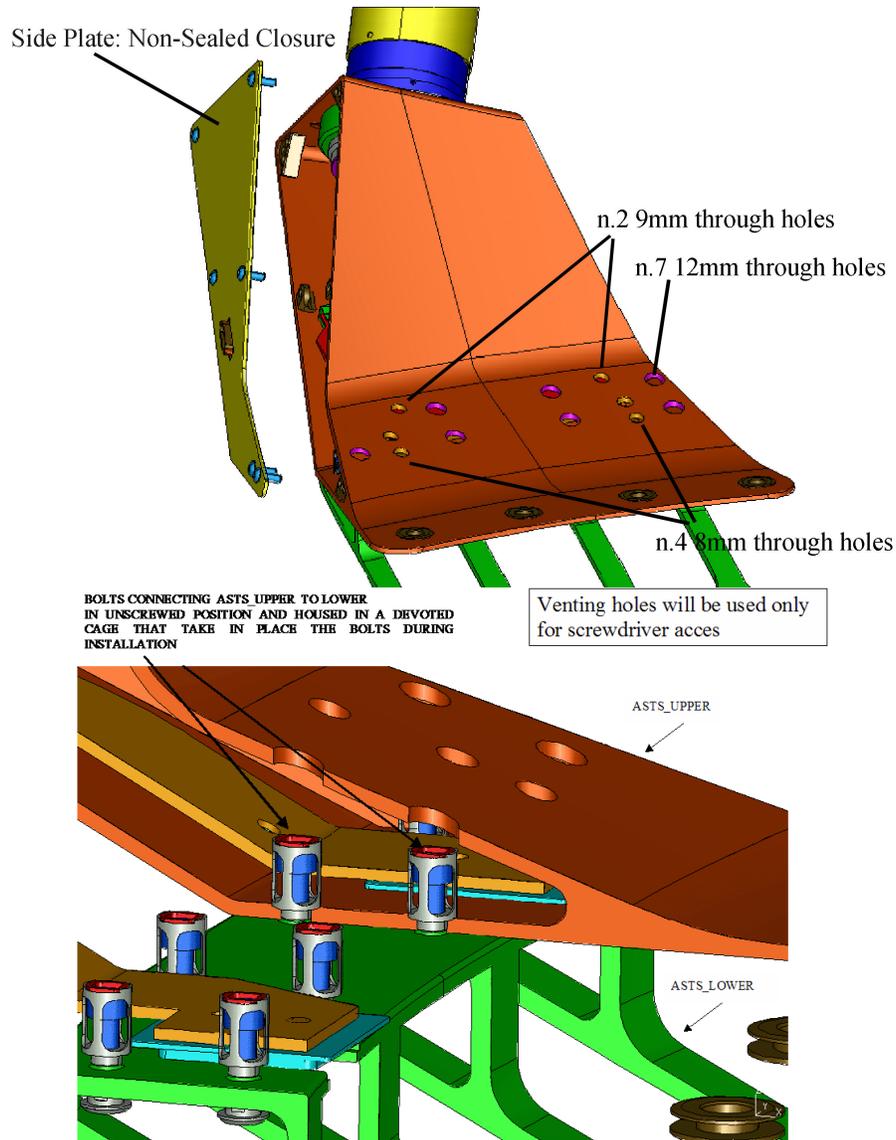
Star Tracker Assembly and Venting Paths
